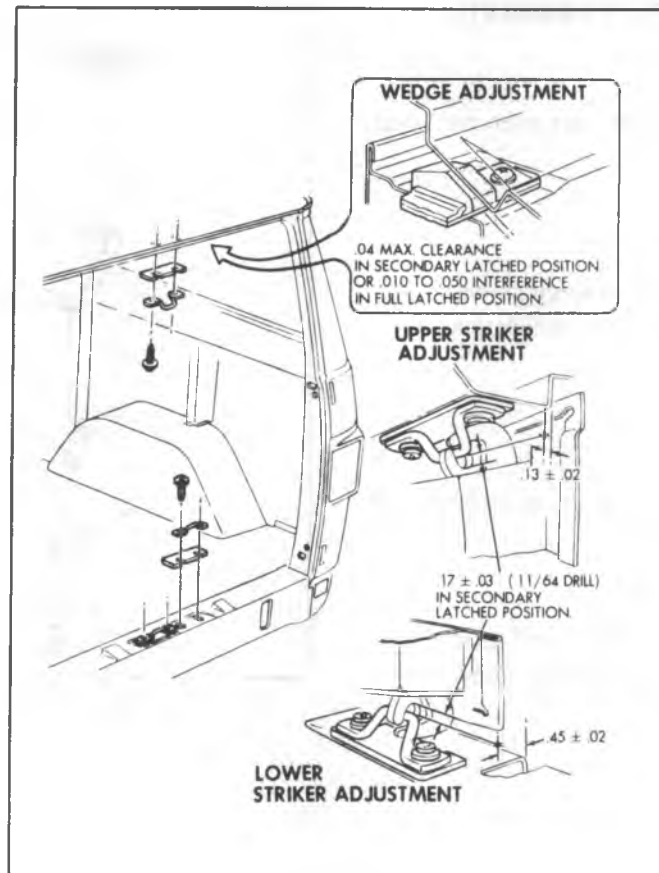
D-133--Rear Door Striker and Wedge Adjustment
